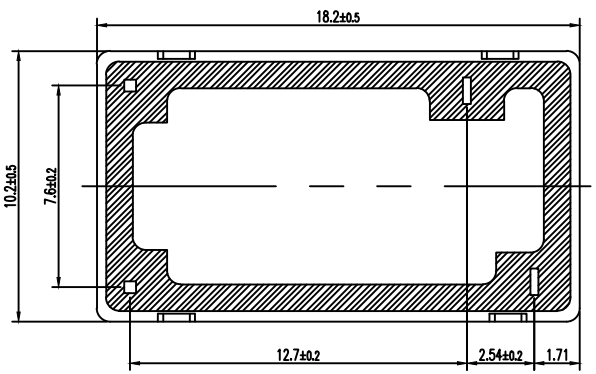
FIGURE FOR PRINTED CIRCUIT BOARD PROCESSING (BOTTOM VIEW)
